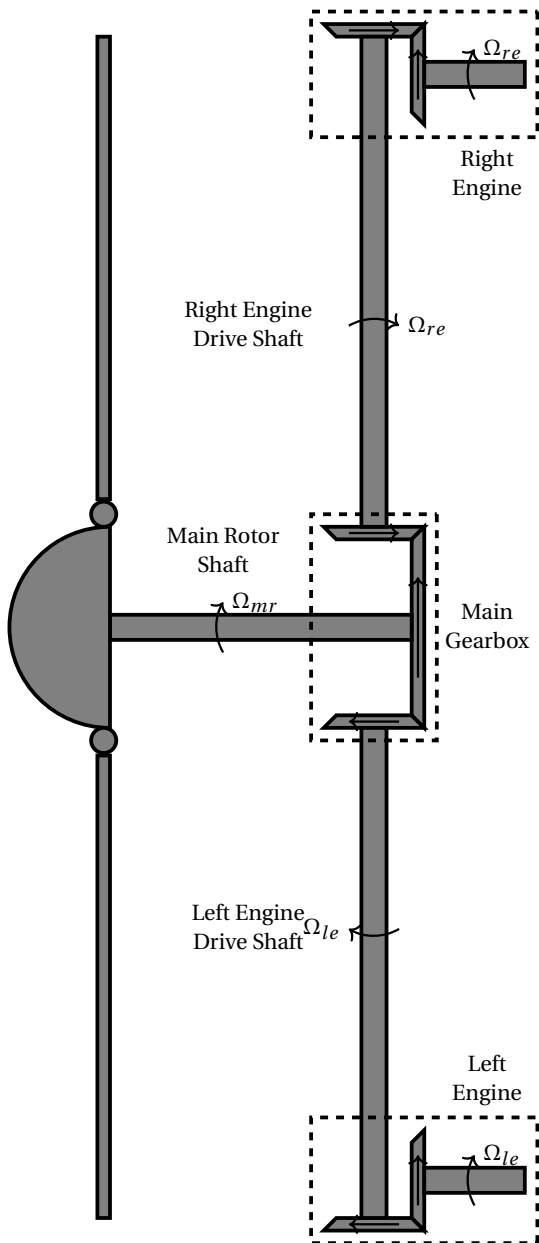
Main gearbox - Transmission from the engine drive shafts to the main rotor shaft.
